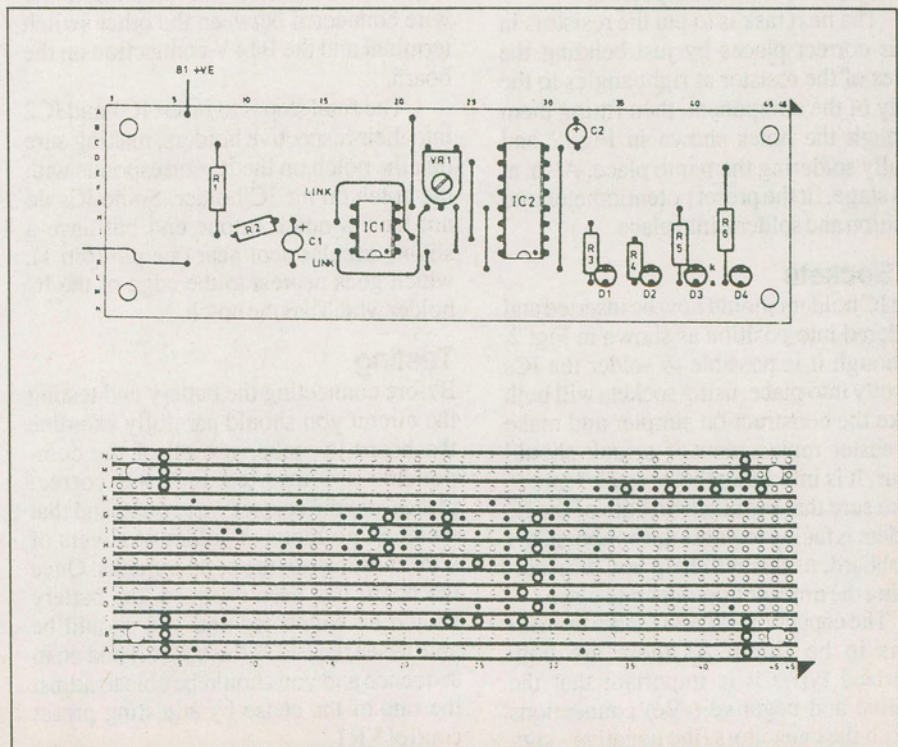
Stripboard component layout and details of breaks required in the underside copper strips. The ICs should be in sockets.
